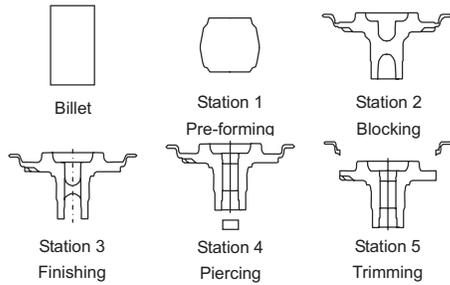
Sketched billet and workpiece passing through five operations in a forging process
